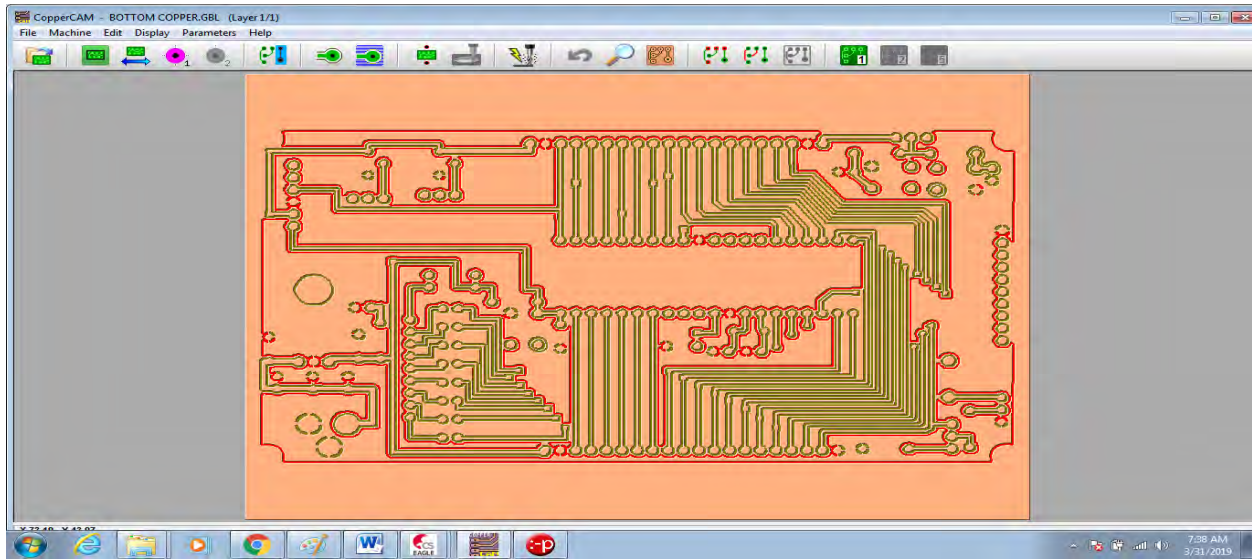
Fabrication of PCBBoard (Bottom Layer)
